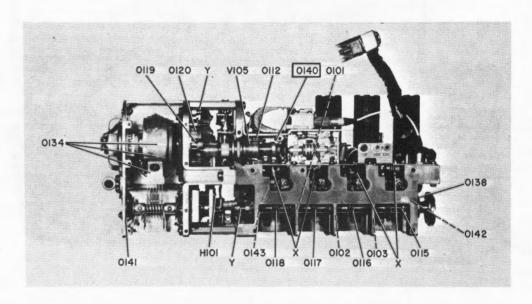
RF and PA Amplifier Assembly, Left Side, Disassembly Points
